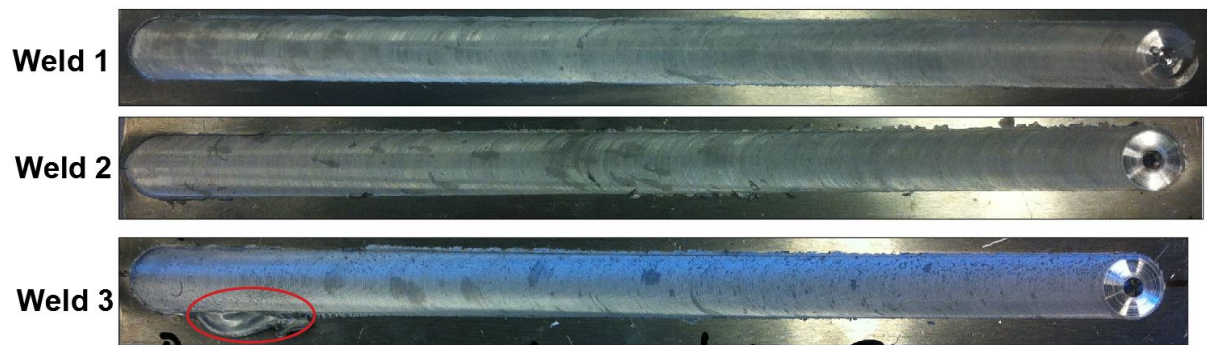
Visual inspection of conventional FSW lap joints with three different welding parameters.
